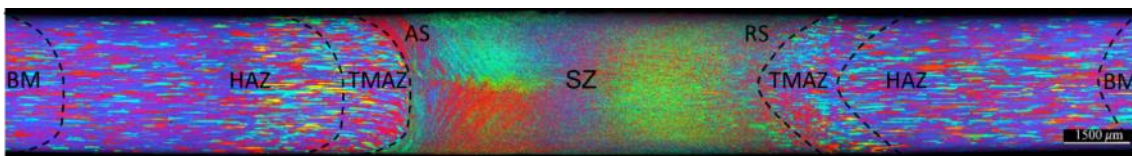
Macrograph of SRBT-FSW in AA2060 showing the indications of the weld zones and BM.
